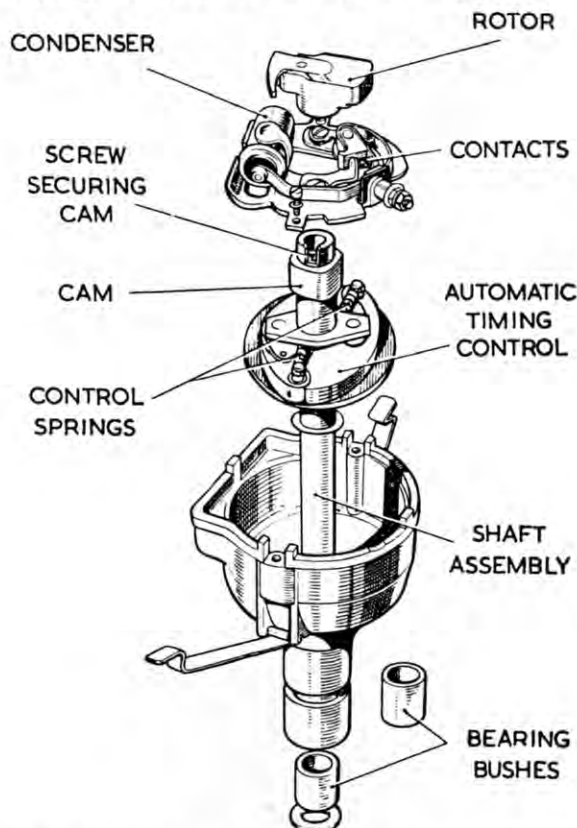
Exploded view of distributor used on TB, TC, early TD and early Y. Those used on other models differ slightly in some details.
